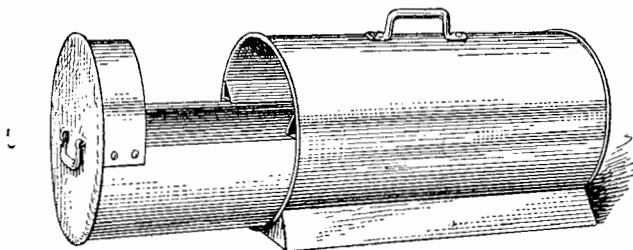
Sheet Metal Telescope Tool Chest Partly Opened
